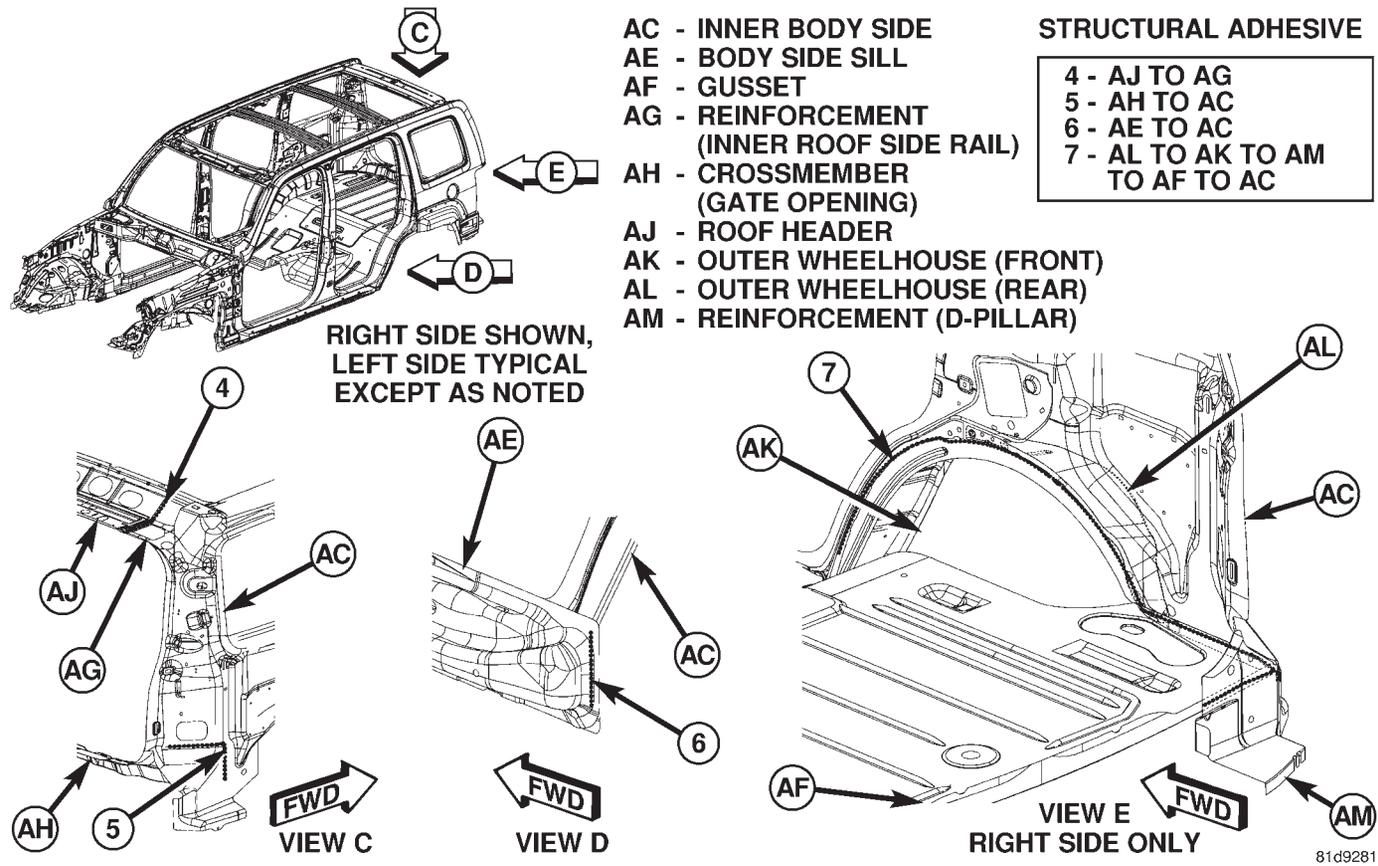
BODY IN WHITE WITHOUT ROOF (2 OF 3)
